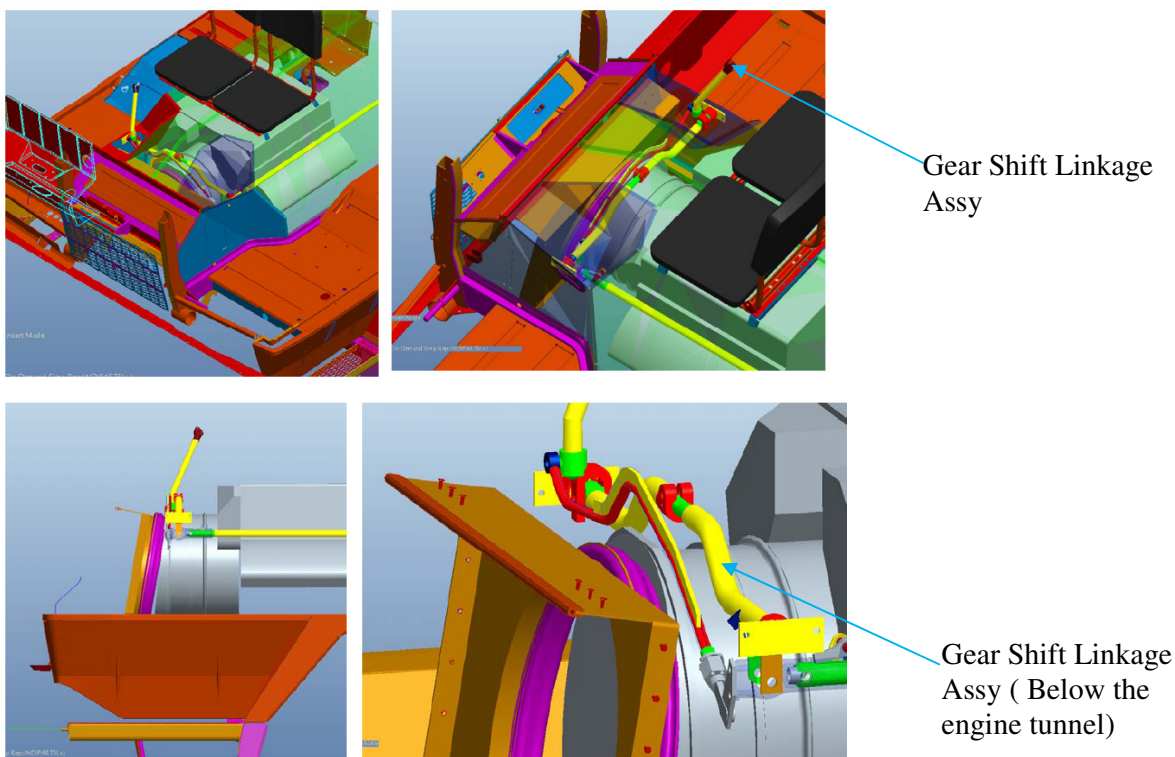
Gear Shift Linkage Assy in the Drivers cabin
